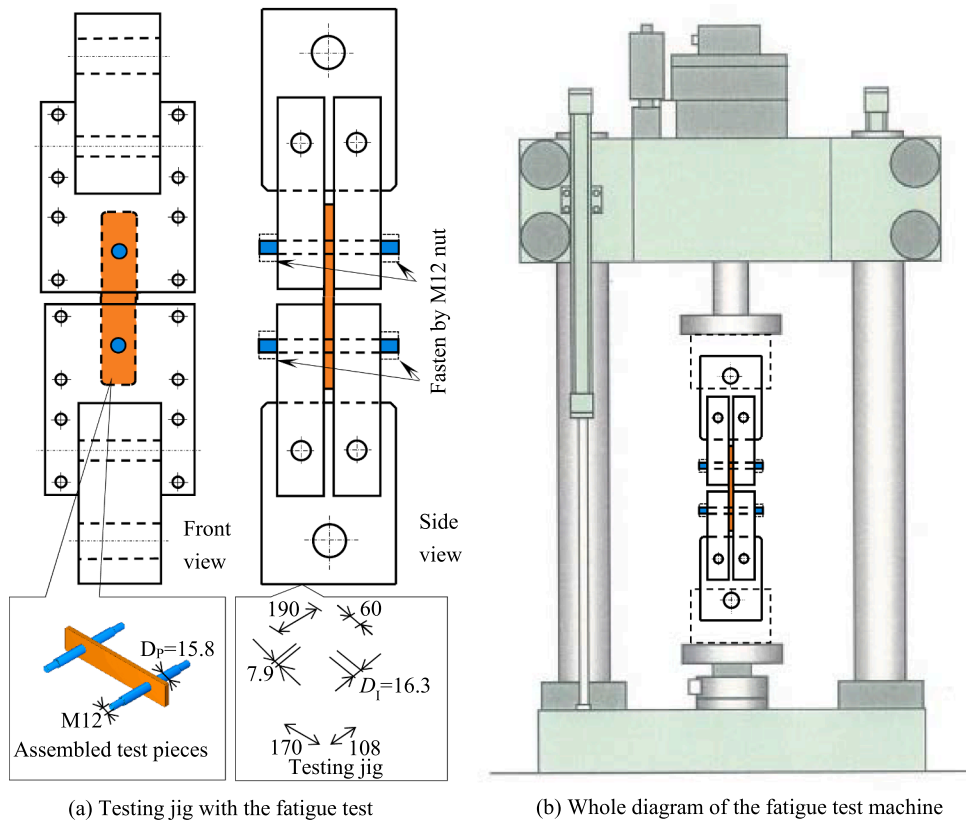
Schematic illustration of the testing jig and fatigue test machine (unit: mm).
